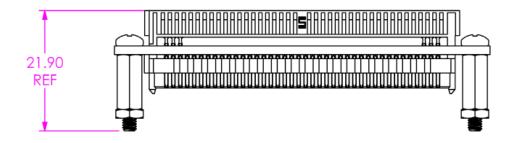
Mechanical Dimensions for FMC Extender Card (in millimeters)
